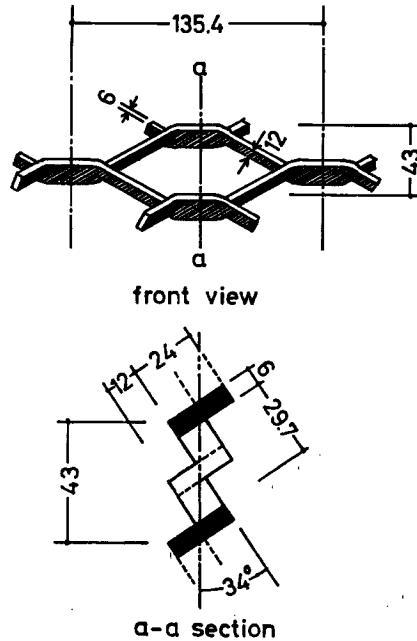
Front view and the section of the expanded metal. (unit: mm)
